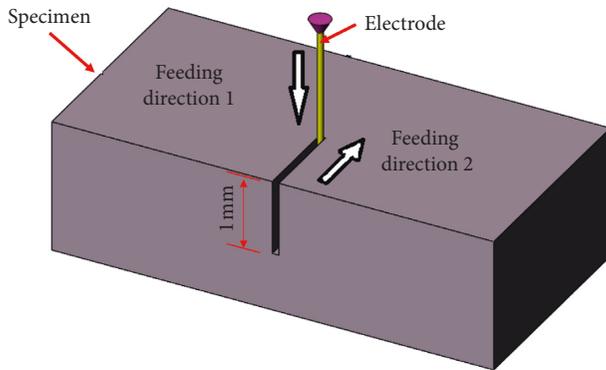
Detailed machining process of prefabrication of the crack.
